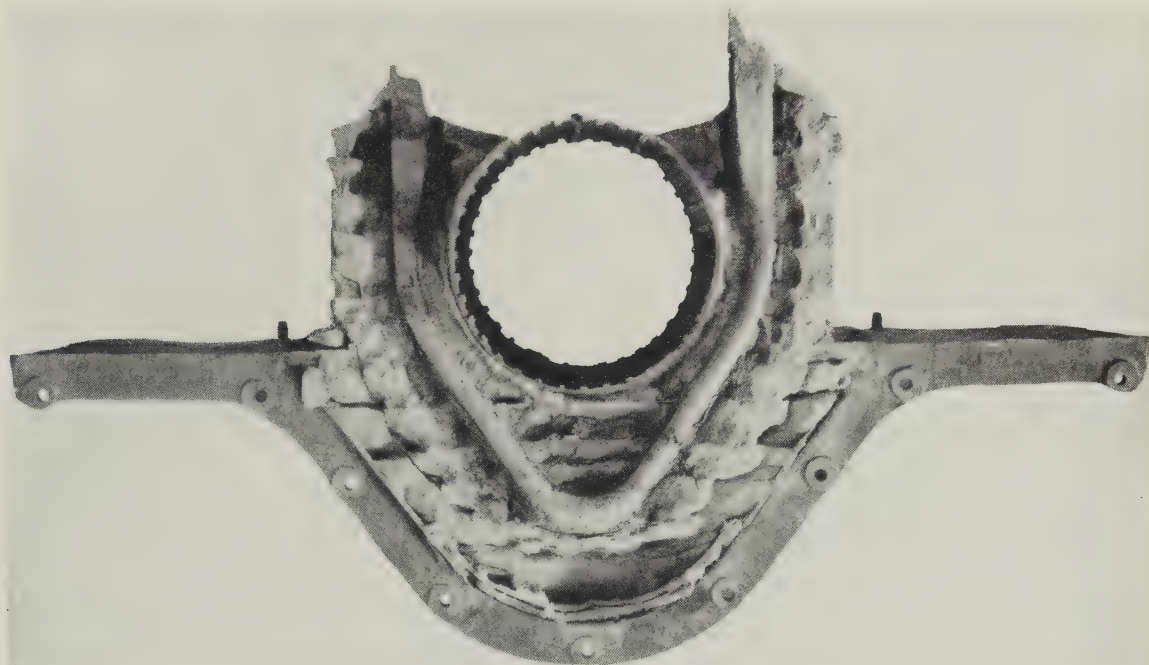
Cross-Section through Transformer Unit of Furnace Used for Melting Leaded Brass, Showing Example of Metal Penetration Between Incompletely Bonded Ramming Layers, and a Fracture of the Metal in the Secondary Channel Due to Contraction during Uncontrolled Freezing.
